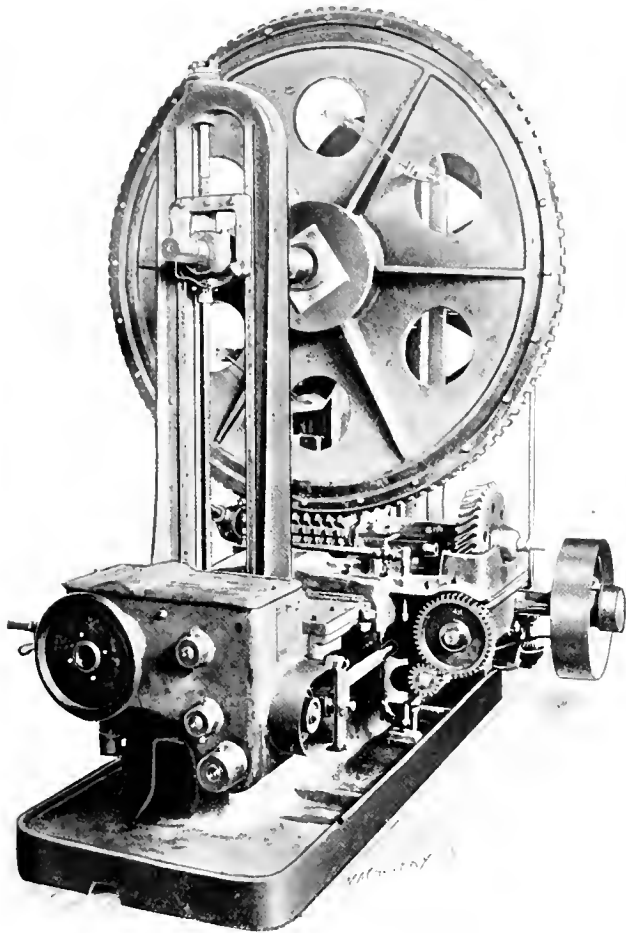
Gould & Eberhardt Gear-cutting Machine arranged for Hobbing Worm-wheels.
